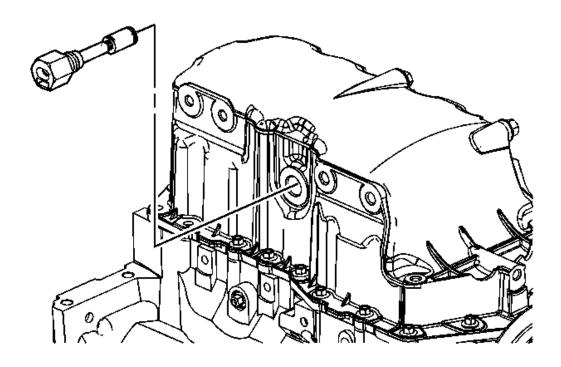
Identifying Oil Level Sensor Courtesy of GENERAL MOTORS CORP.
